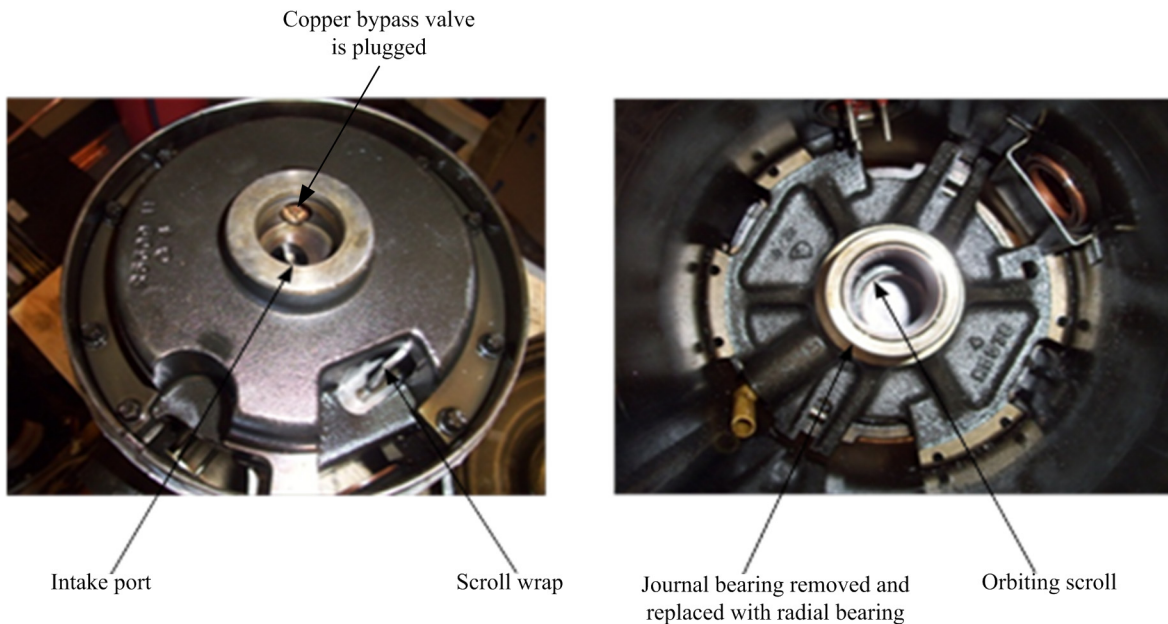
Removal of the bypass valve and journal bearing of the original Bristol H20R483DBE scroll module; the journal bearing was replaced with a radial roller bearing.
